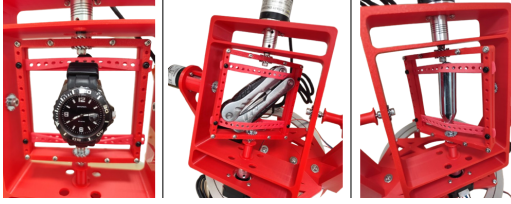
A watch (left), a multitool (middle) and a CO₂ canister (right) secured using the universal mounting fixture.
